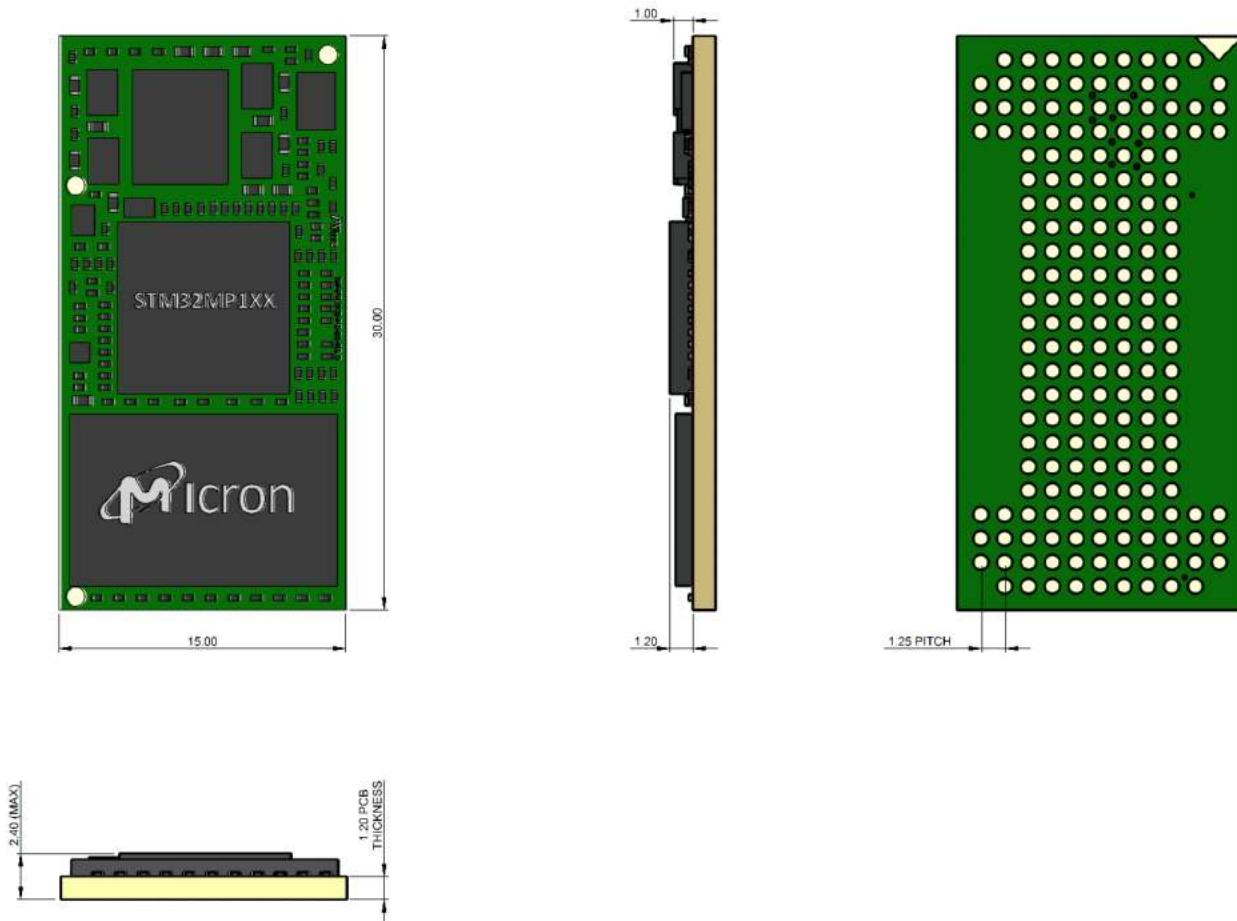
Mechanical dimension of STM32MP13x OSM LGA Module
